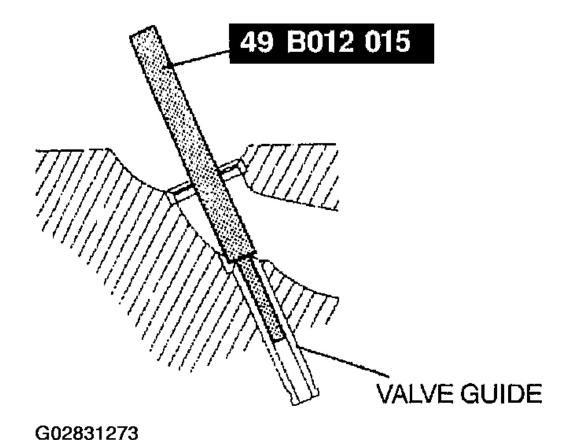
Removing Valve Guide Courtesy of MAZDA MOTORS CORP.
